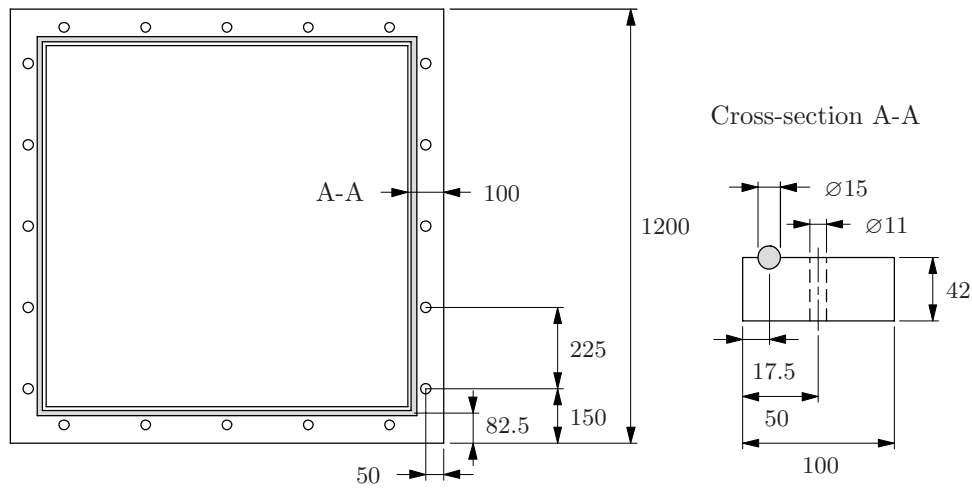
Dimensions of square wooden frame with rubber string for mounting the panel [mm].
